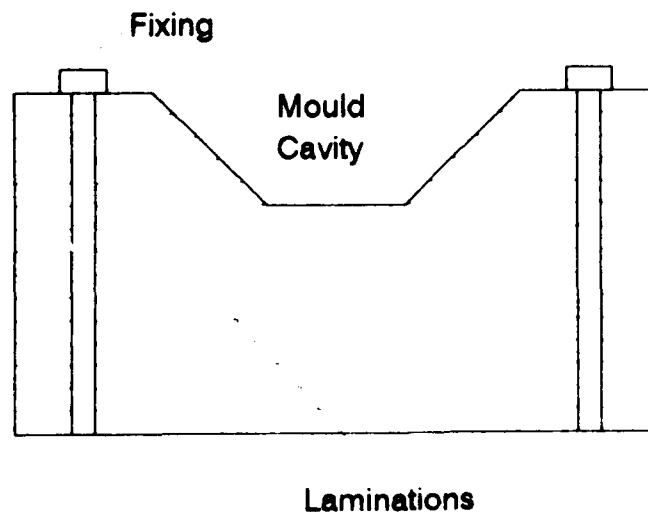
Typical arrangement for holding/fixing laminated tooling.
